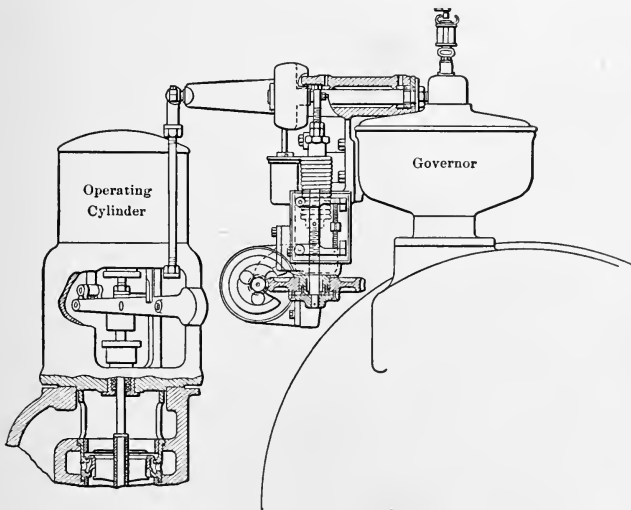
Assembly of Governor and Operating Cylinders for Steam Relay Control.
